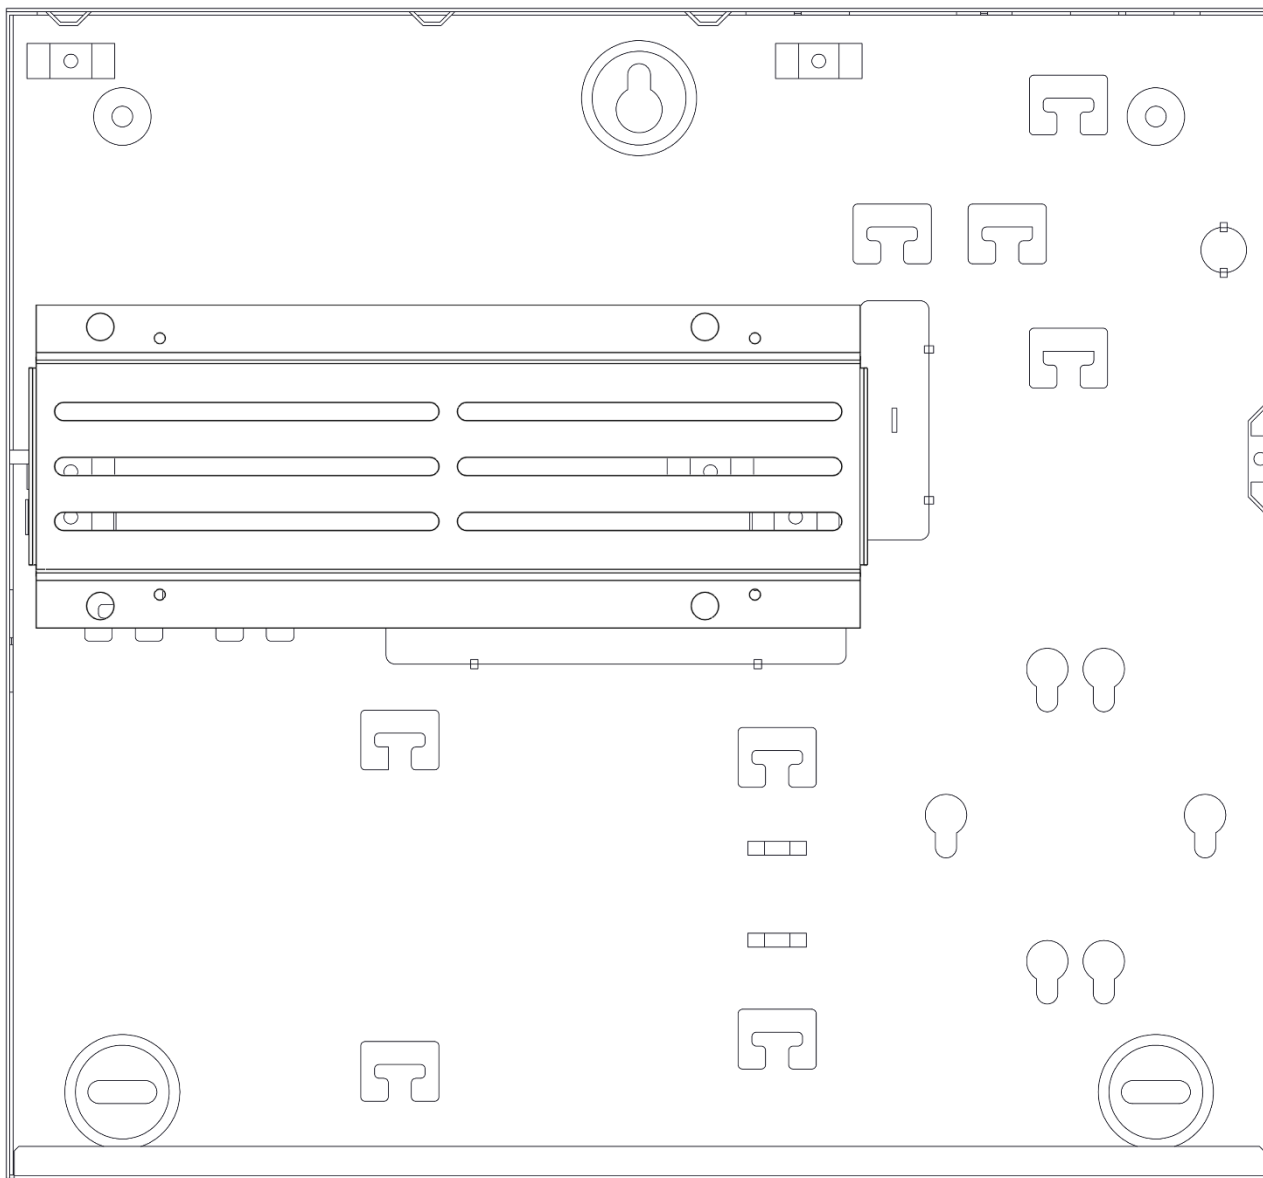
Mounting bracket placed on the suggested Bosch B11 metal fire enclosure with the screwing holes poking out of the a) marked zone.
